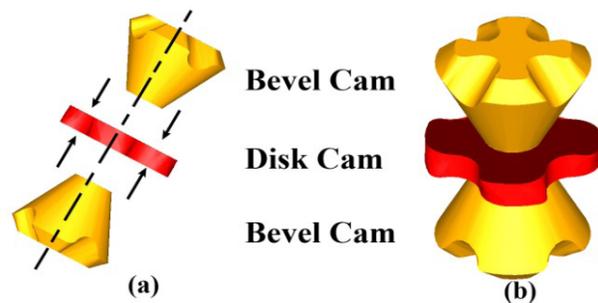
(a) Exploded view of the bevel-disk-bevel cam arrangement. (b) Assembly of the bevel-disk-bevel cam.
